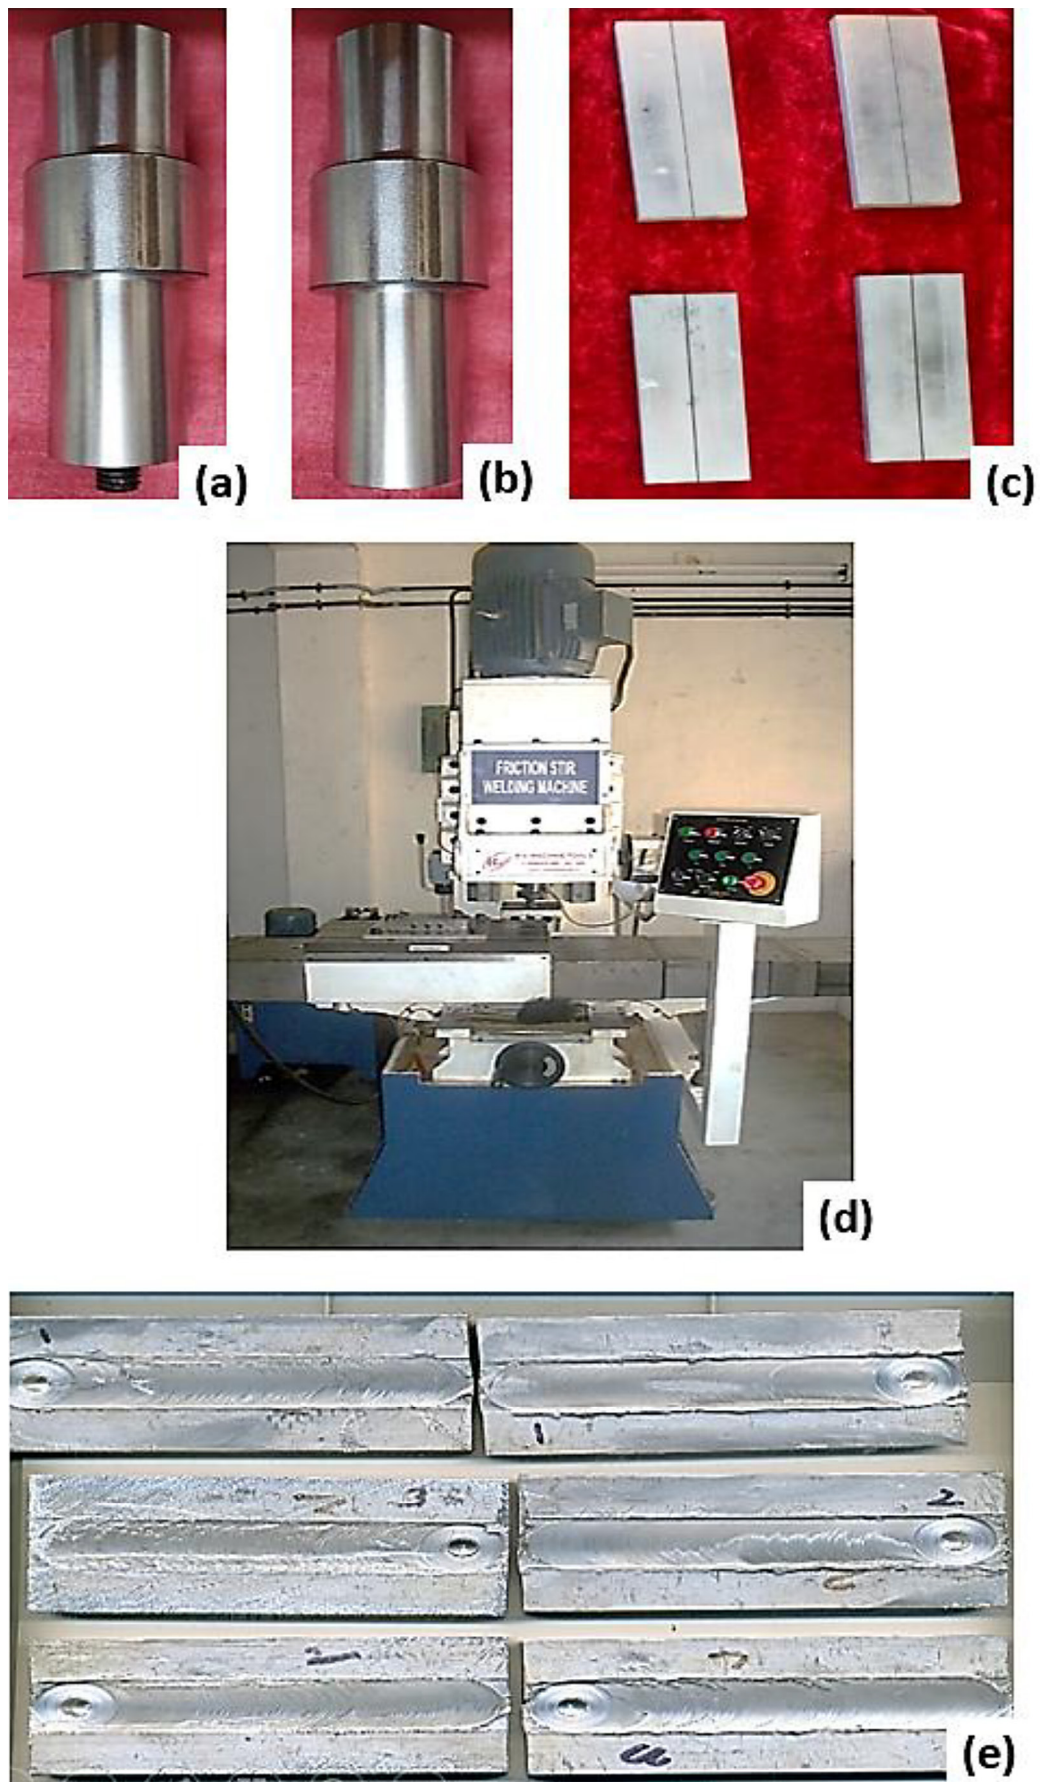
Experimentation illustrations: (a) pin tool (b) pin-less tool (c) grooved AA6063 specimens (d) friction stir welding machine (e) specimens of FSPed composite
